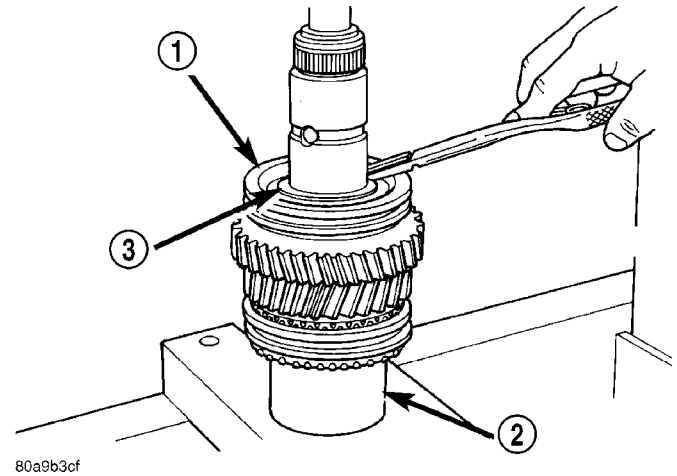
PRESS 1-2 SYNCHRO ASSEMBLY
